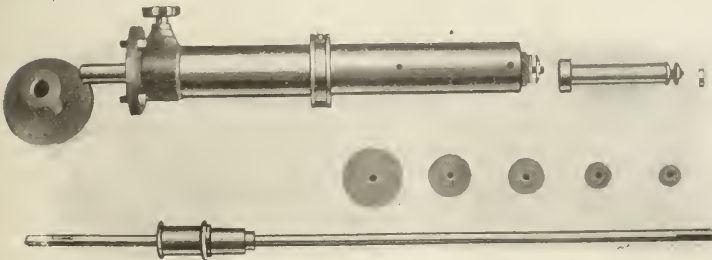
Grinding Spindle and Wheels used on Wood & Safford Grinder
